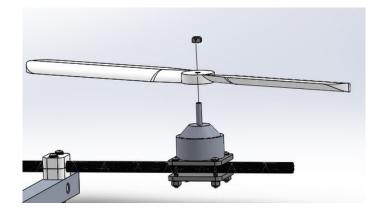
The propeller is placed on the protrusion on top of the motor and then secured to the motor with the motor's provided screws.
